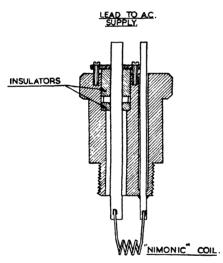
Pre-ignition plug (hot-wire type)
